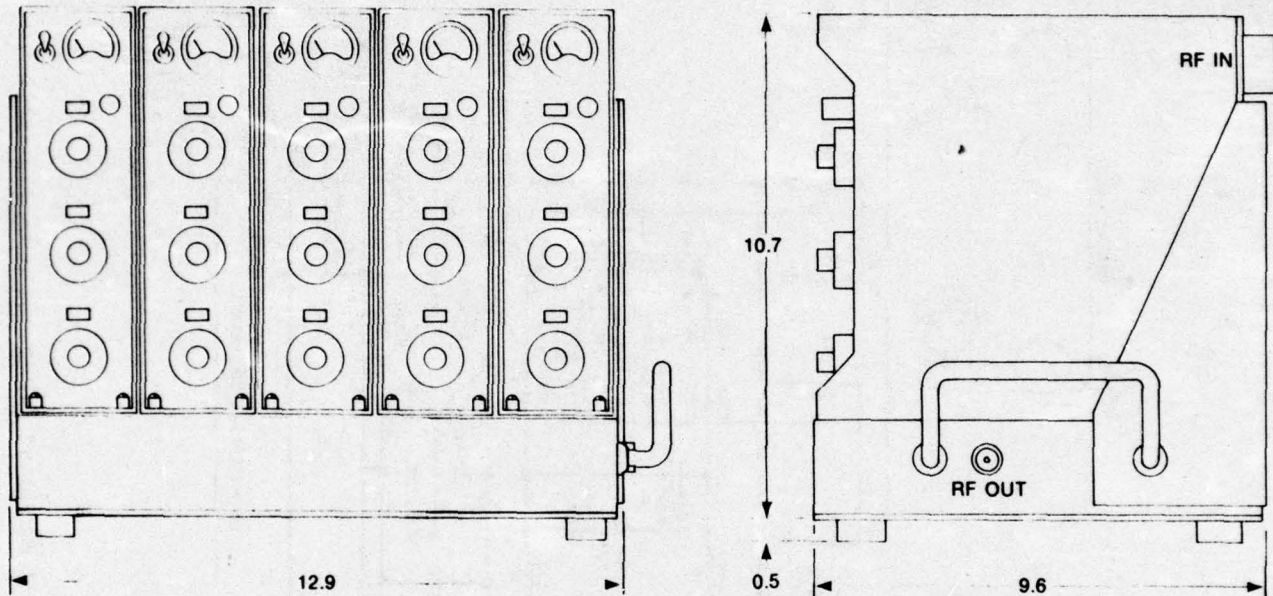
Outline Drawing, 5-Channel Multicoupler.
